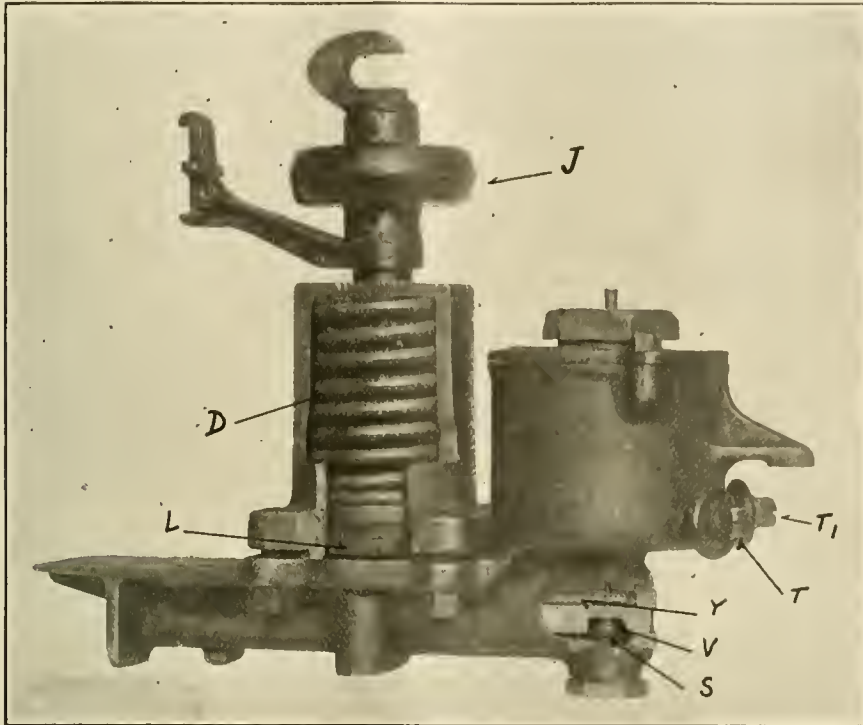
CYLINDER AND MAGNET VALVE CUT TO SHOW WORKING PARTS.
